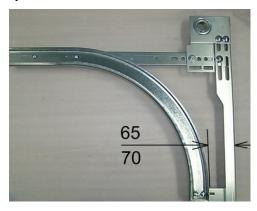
Mounting Horizontal Track/Bracing Angle & End Bracket
